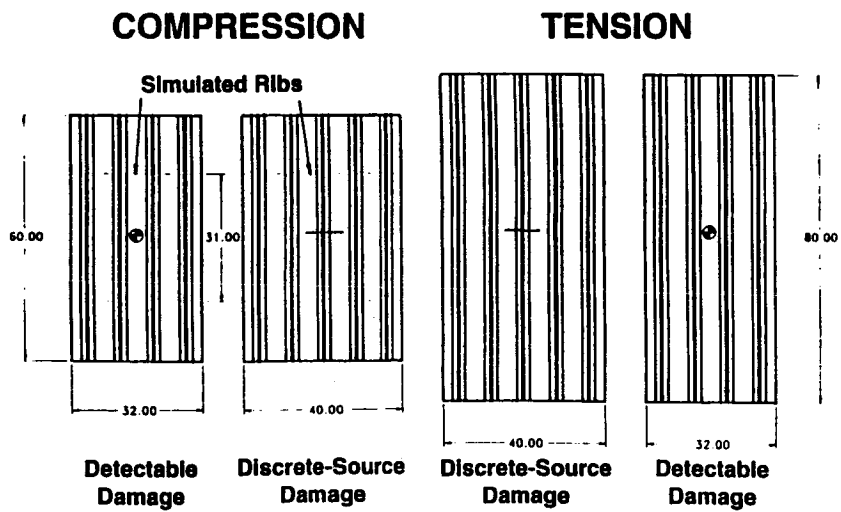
Wing Cover Damage Tolerance Test Panels
